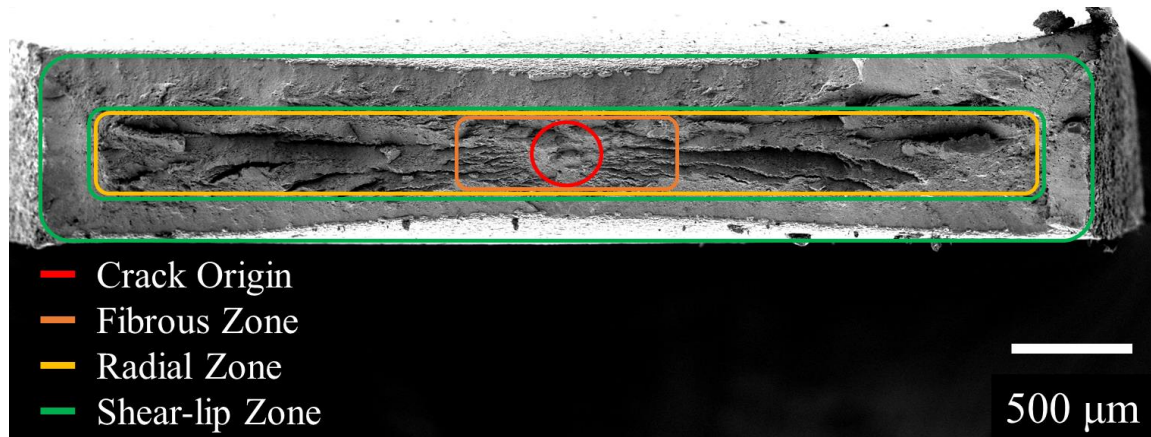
Fracture surface of rectangular tensile specimen (M-670-120) showing the crack origin, fibrous zone, radial zone and the shear lip zone.
